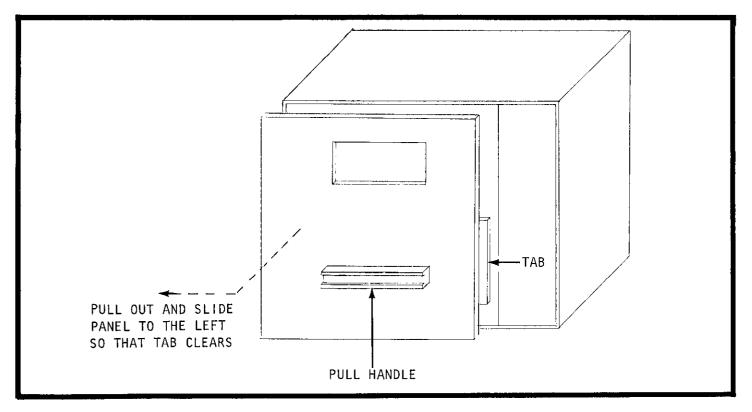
How to Open the Front Panel to Access the Mechanism.
